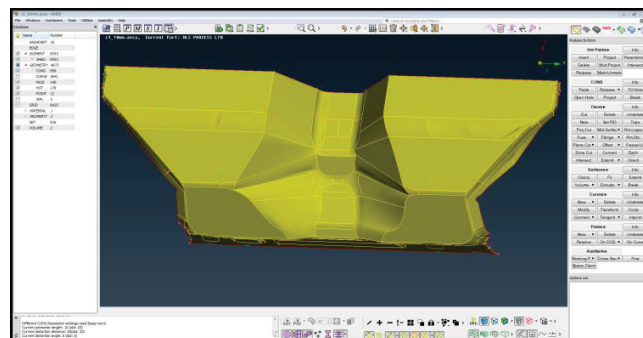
3. Modified CAD model in ANSA without Flanges.
